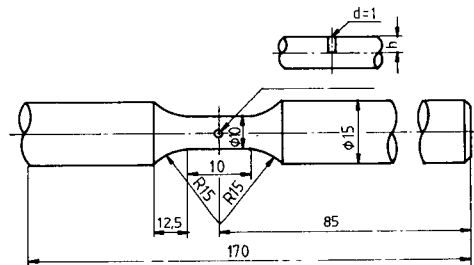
Geometry of fatigue test specimen (Unit : mm)
